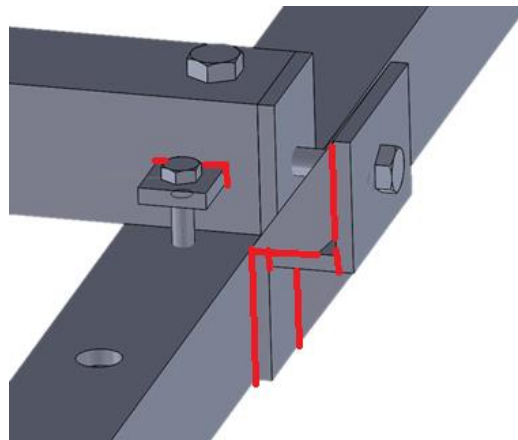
Brackets and tabs with the welding line indicated in red.
